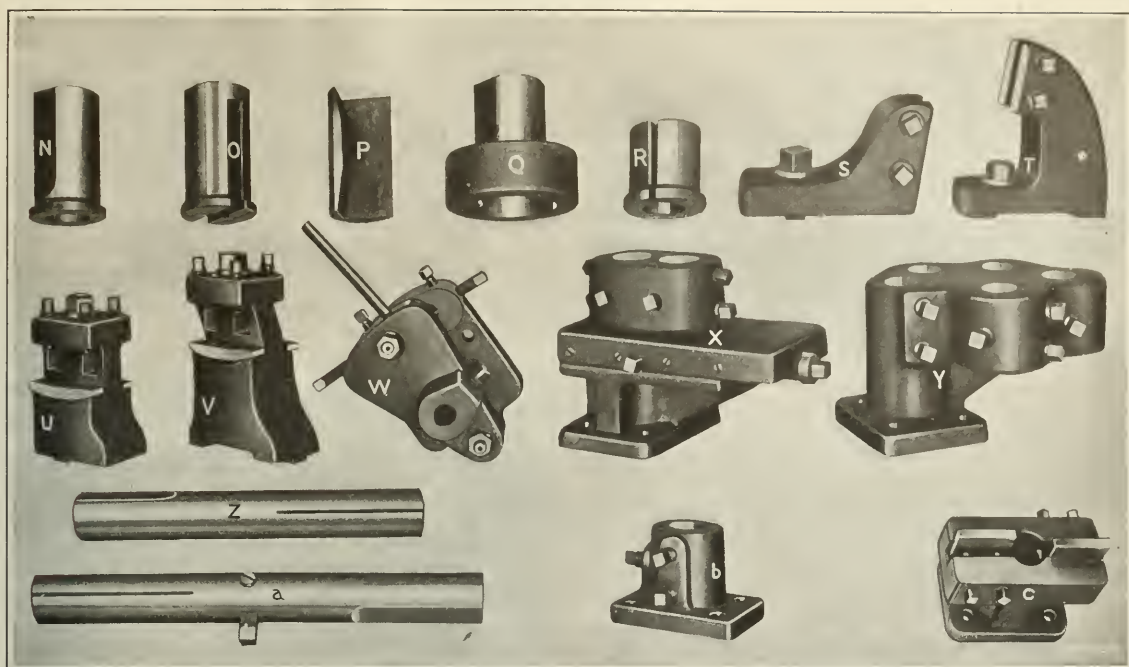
N to R, Adapters; S and T, Forming Tool-holders; U and V, Double Tool-holders; W, Receding and Back-facing Tool; X, Tool-slide for Use in recessing and back-facing; Y, Multiple Turning Head; Z, Pilot Bar; a, Boring-bar; b, Adapter; c, Facing Tool
